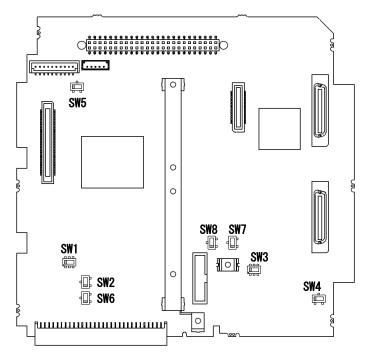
Location of the Slide Switches on the Control PCB
